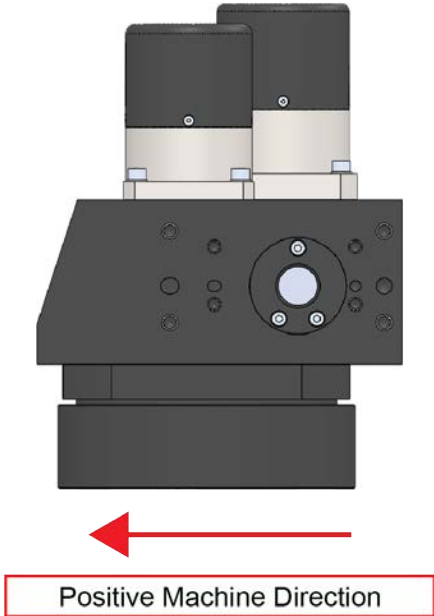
Galvo Y-Axis Machine Direction (side)
